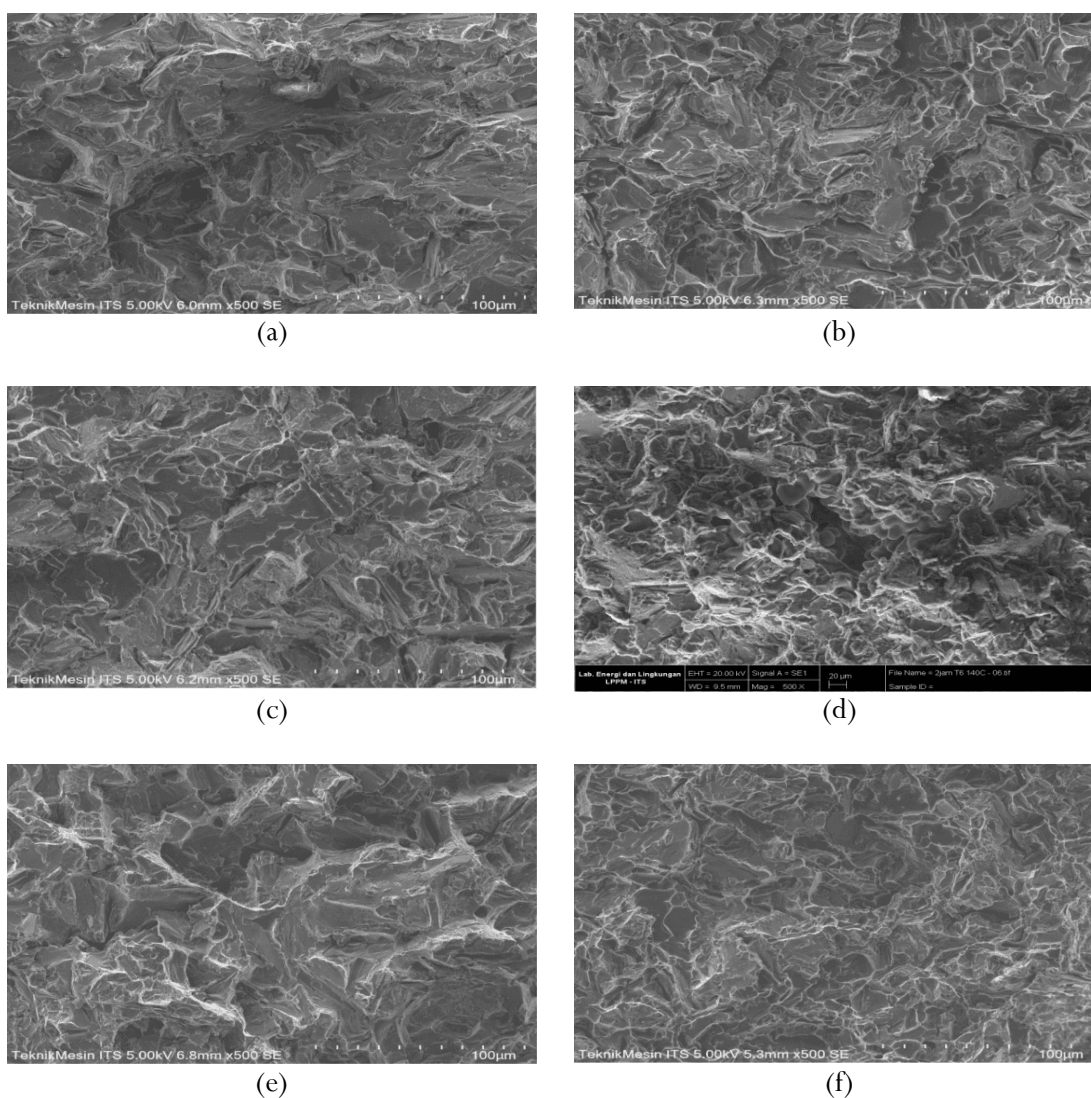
Morphology of fatigue fracture surfaces on Al6061-fly ash: (a) T6-A1, (b) T6-A2, (c) T6-B1, (d) T6-B2, (e) T6-C1, (f) T6-C2
